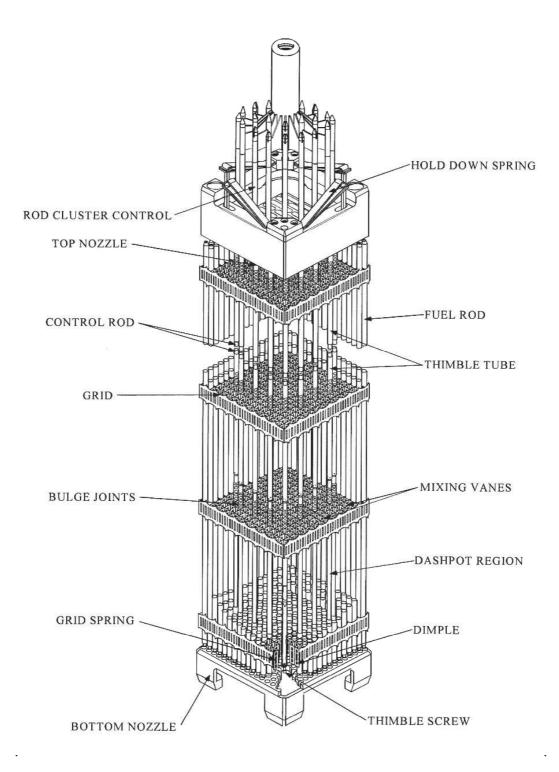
A PWR fuel assembly for 17×17 array of rods (Courtesy of [33]).
